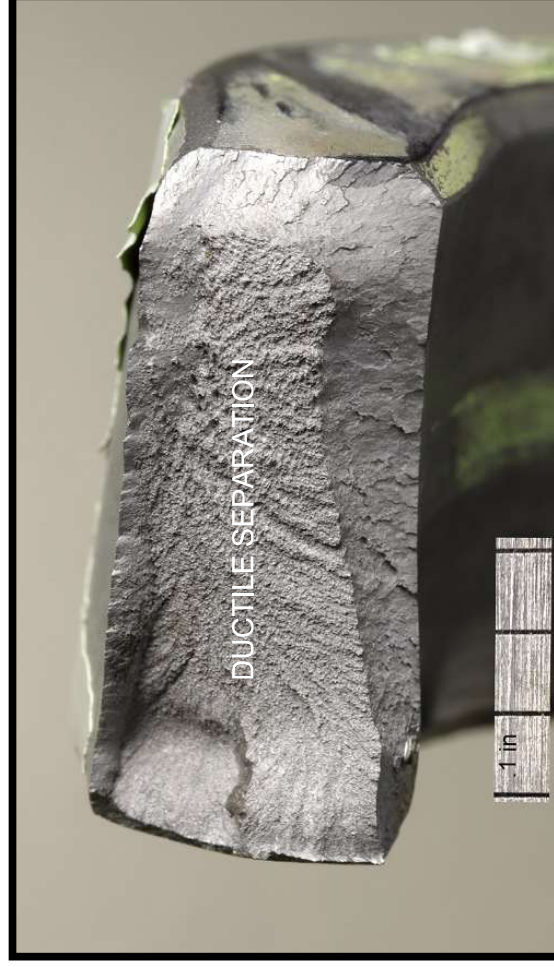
Detailed view of R/H MLG- Side Strut/Bell Crank Link Fracture.
